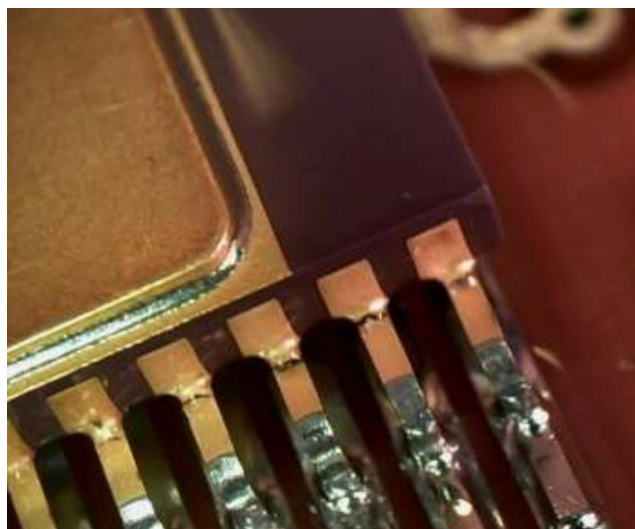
Pin / lead-wire rupture (component heavier than 5gr, without staking)
